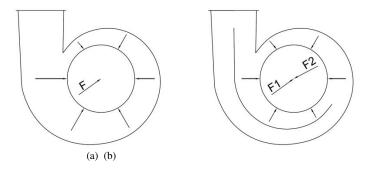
Volute casing types (a)Single Volute (b) Double Volute
